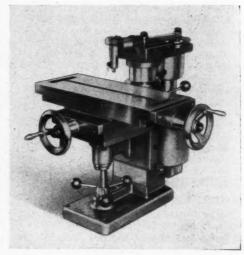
The Arboga UM 400 universal machine is here shown set up for vertical milling
